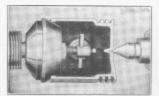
Cross Section View Shows Piston Adapter and Adjustable Driver
